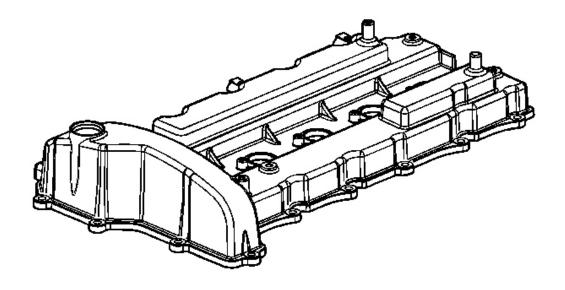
View Of Camshaft Cover Courtesy of GENERAL MOTORS CORP.
